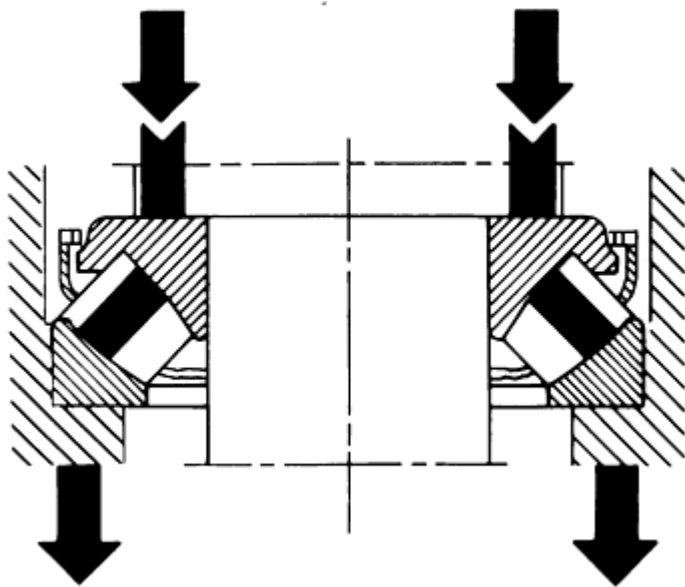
Spherical roller thrust bearing, which incorporates asymmetrical rollers that tolerate a misalignment of $\pm 3^\circ$
